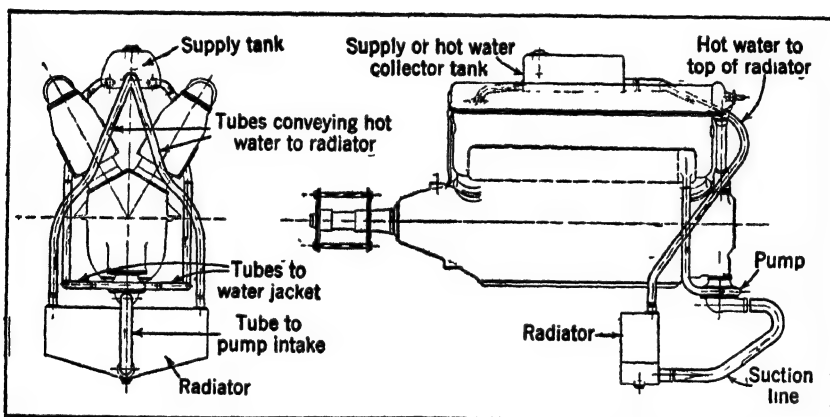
Diagrams Showing the Mounting of the Radiator Below the Engine and the Use of a Supplementary Supply Tank Placed Above the Motor Cylinders.
